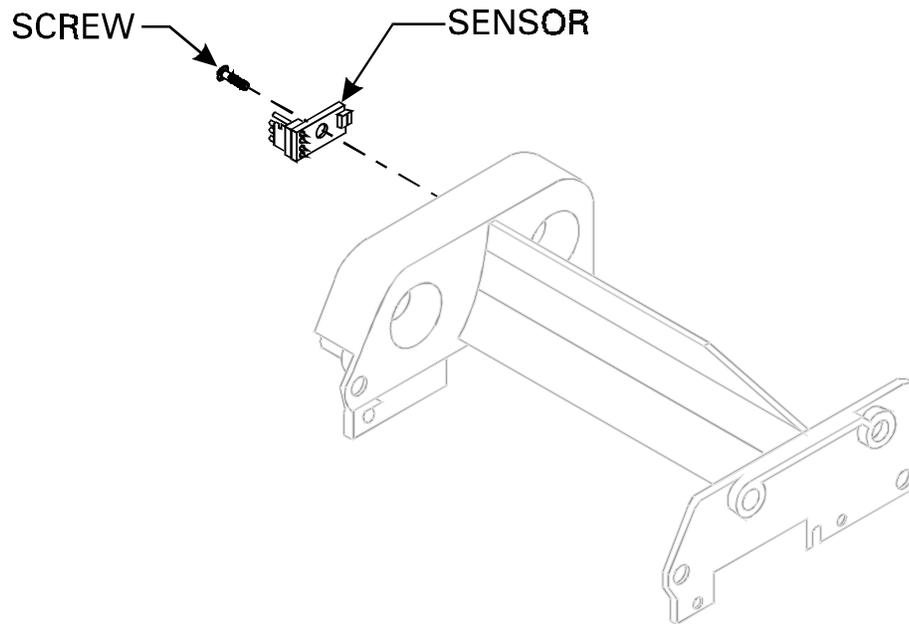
Ribbon Out Sensor Assembly Kit PN 503018M
